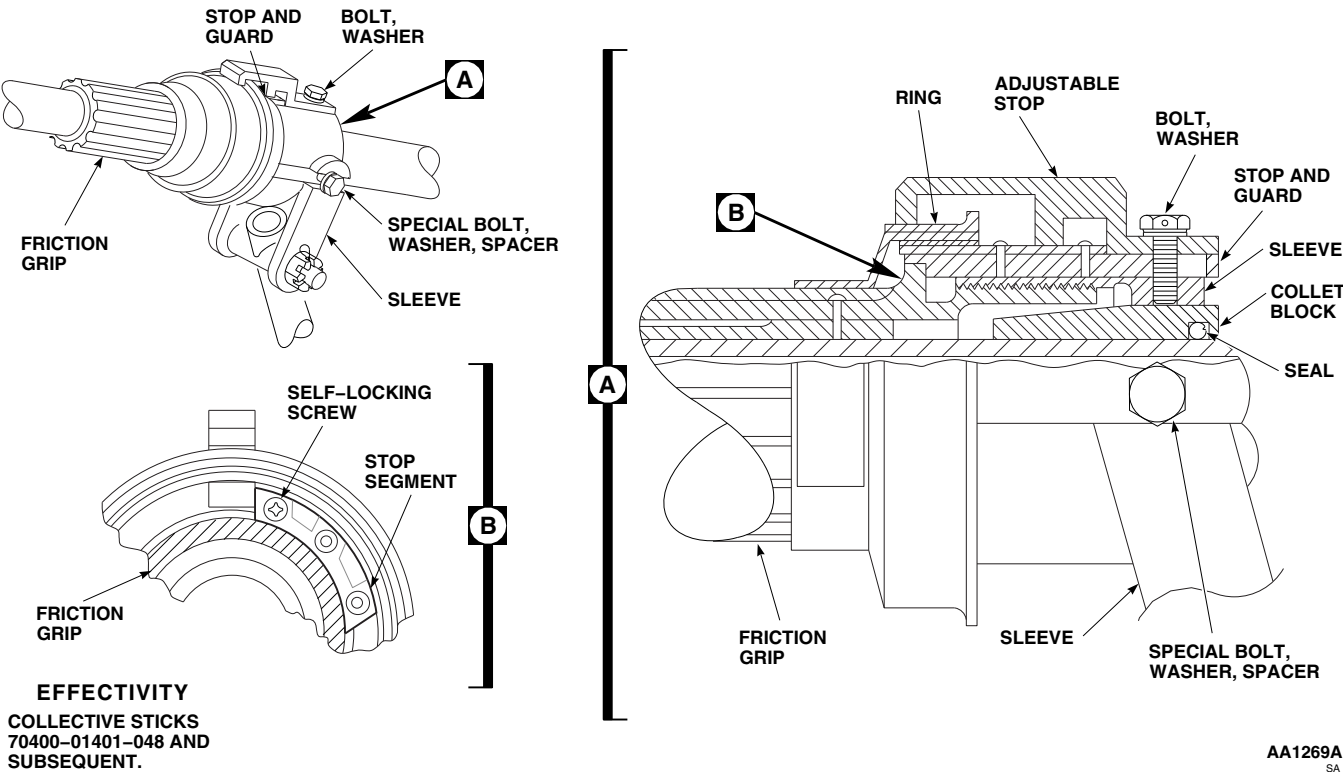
ADJUST FRICTION LOCK
